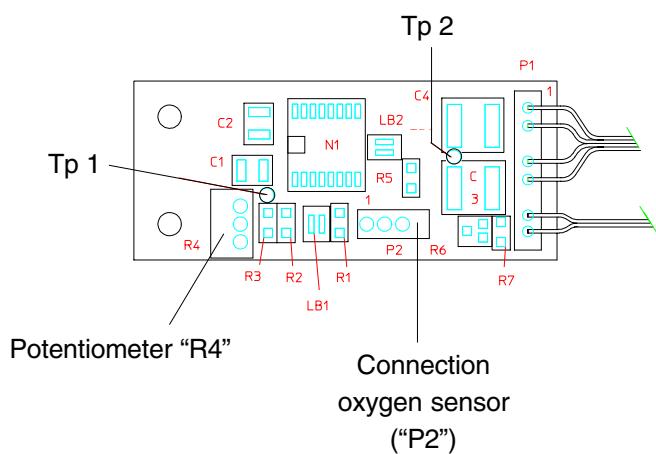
PCB “OXS”, assembled, horizontal projection
